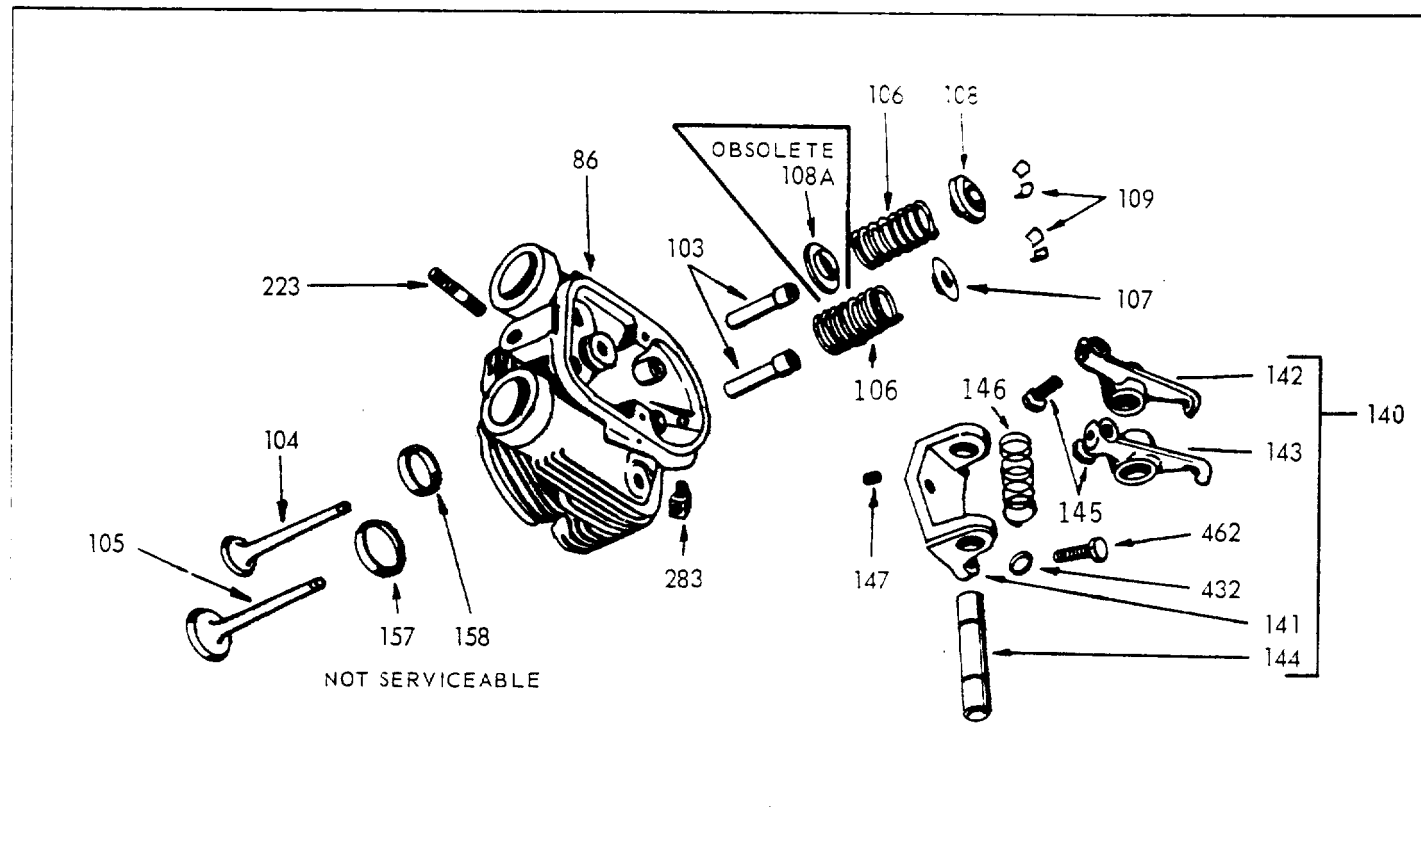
CYLINDER HEAD AND ROCKER ARM ASSEMBLIES
